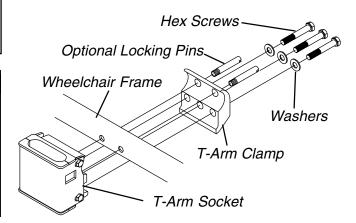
INSTALLING THE T-ARM SOCKETS
